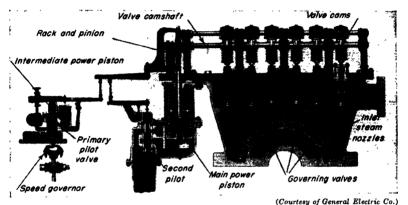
Double relay mechanical-hydraulic speed governor.
